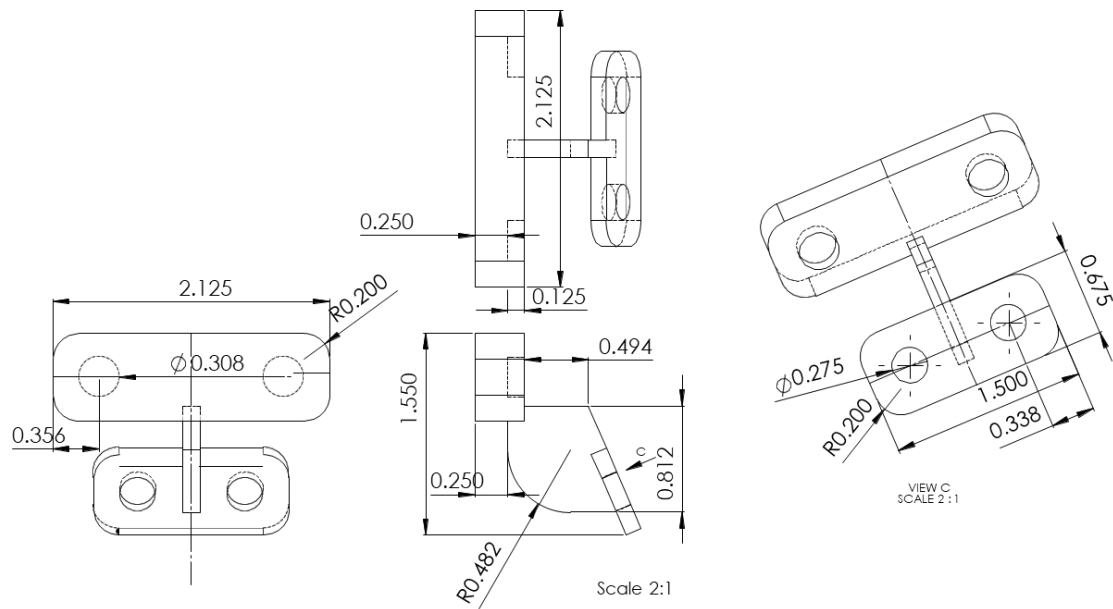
2D Drawing of connectors. Dimensions in inches.
